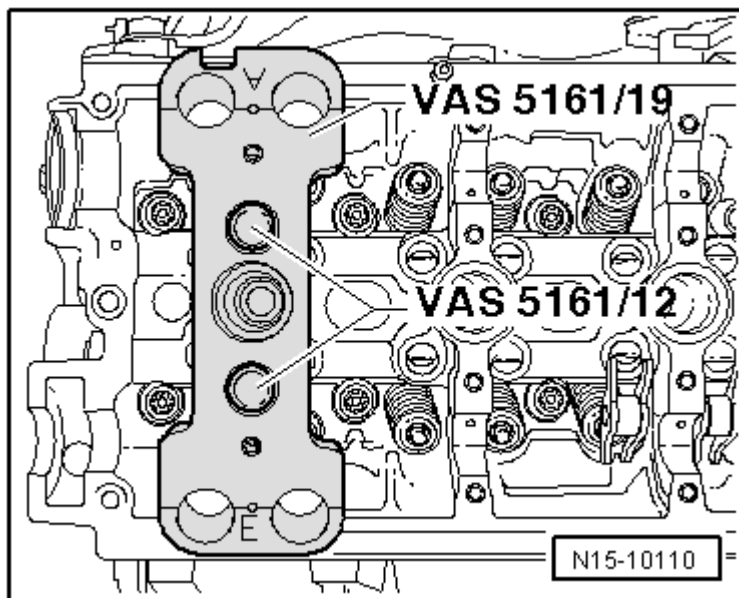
Identifying Install Guide Plate VAS 5161/19 With Knurled Bolts VAS 5161/12 On Cylinder Head
